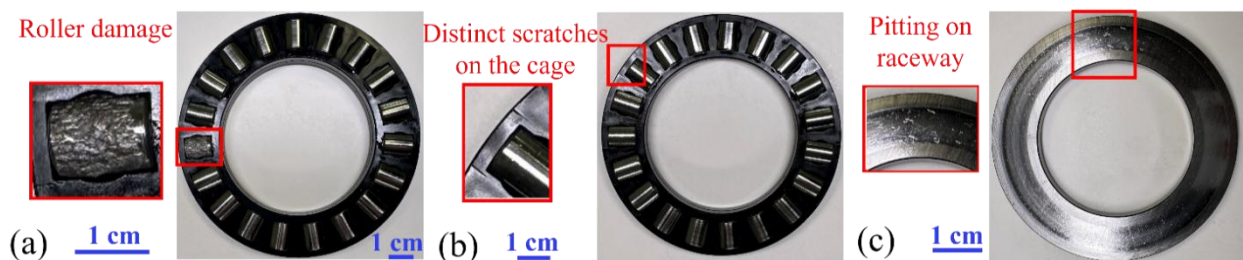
The damage inspection of the bearing after testing. (a) Front view of the cage and rollers with severe damage on one roller. (b) Backward view of cage and rollers with scratches on the cage. (c) Up raceway with pitting
